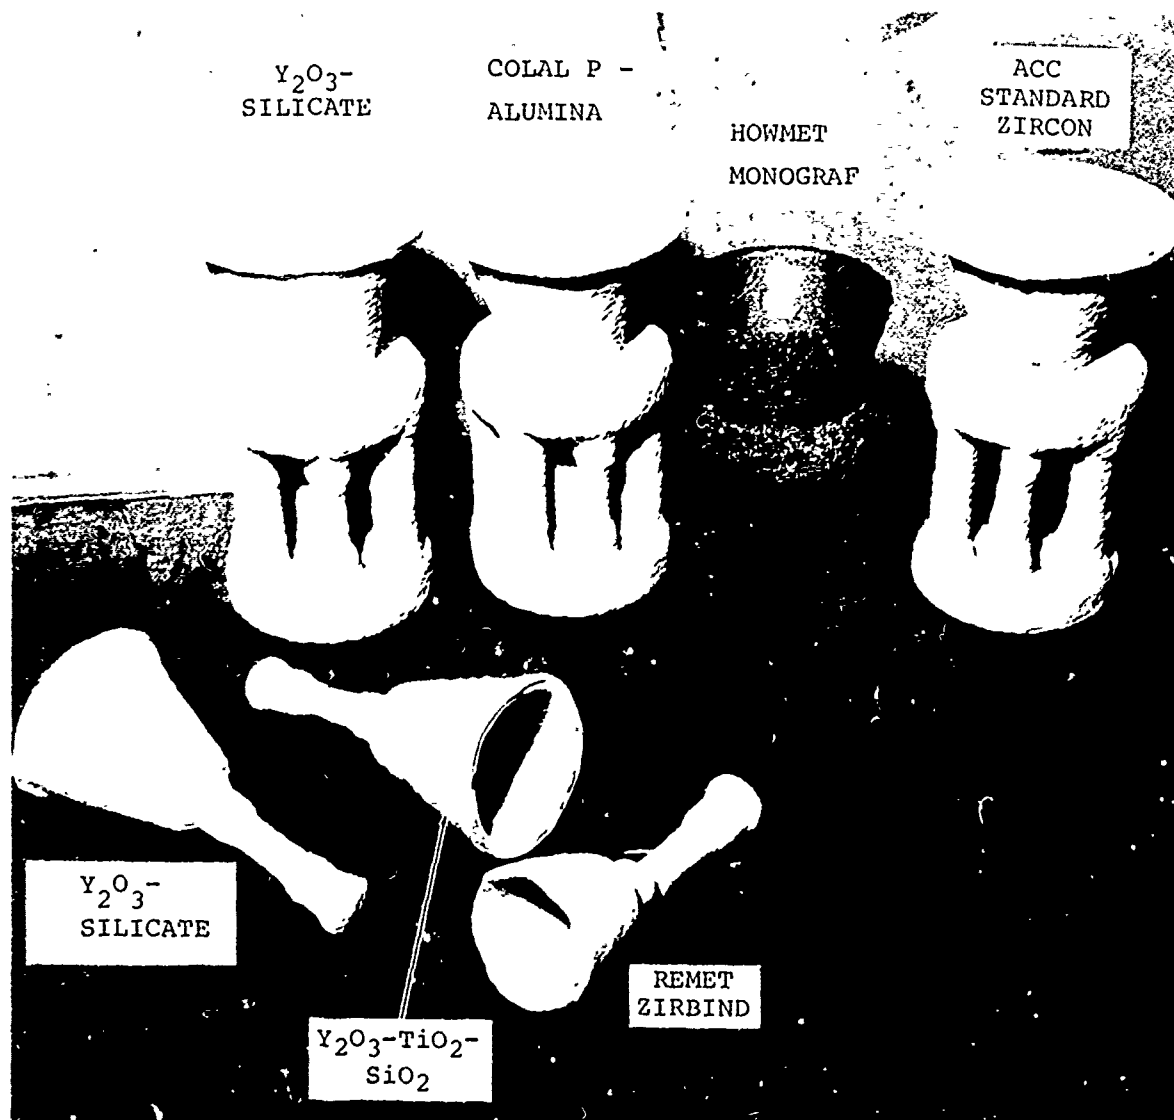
Appearance of Various Molds Fabricated for Use in Casting Trial "B". Note the Broken Remet Mold.
